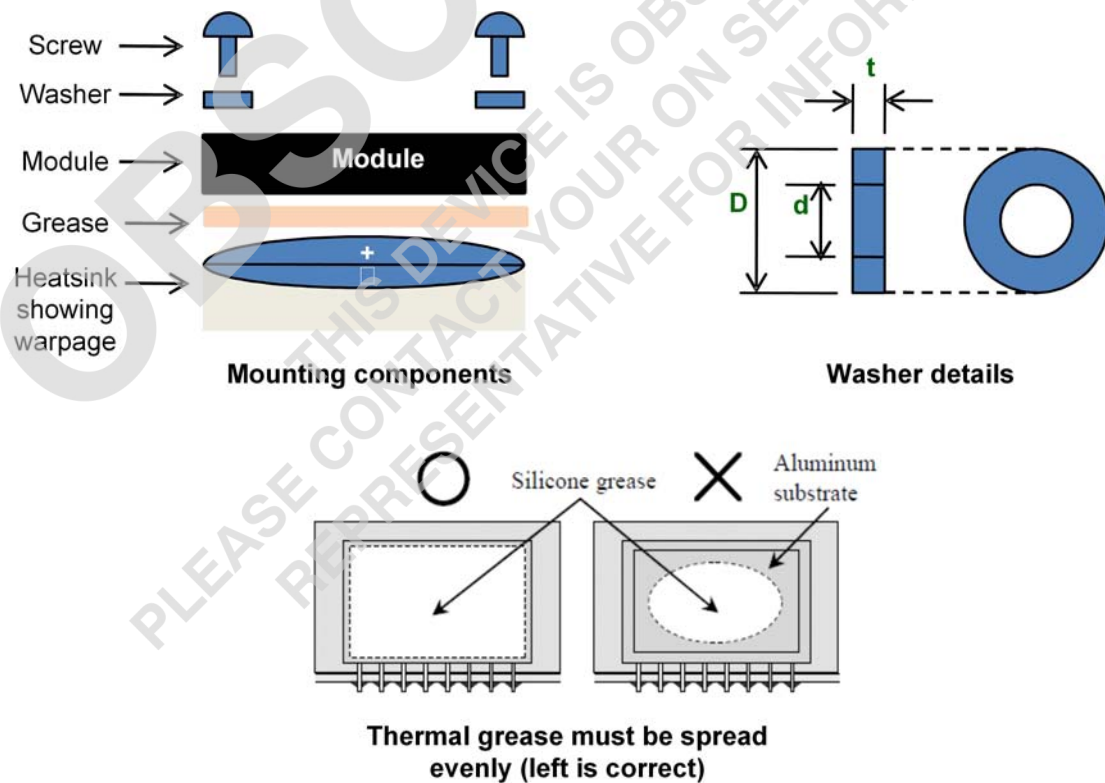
Module Mounting details: components; washer drawing; need for even spreading of thermal grease
